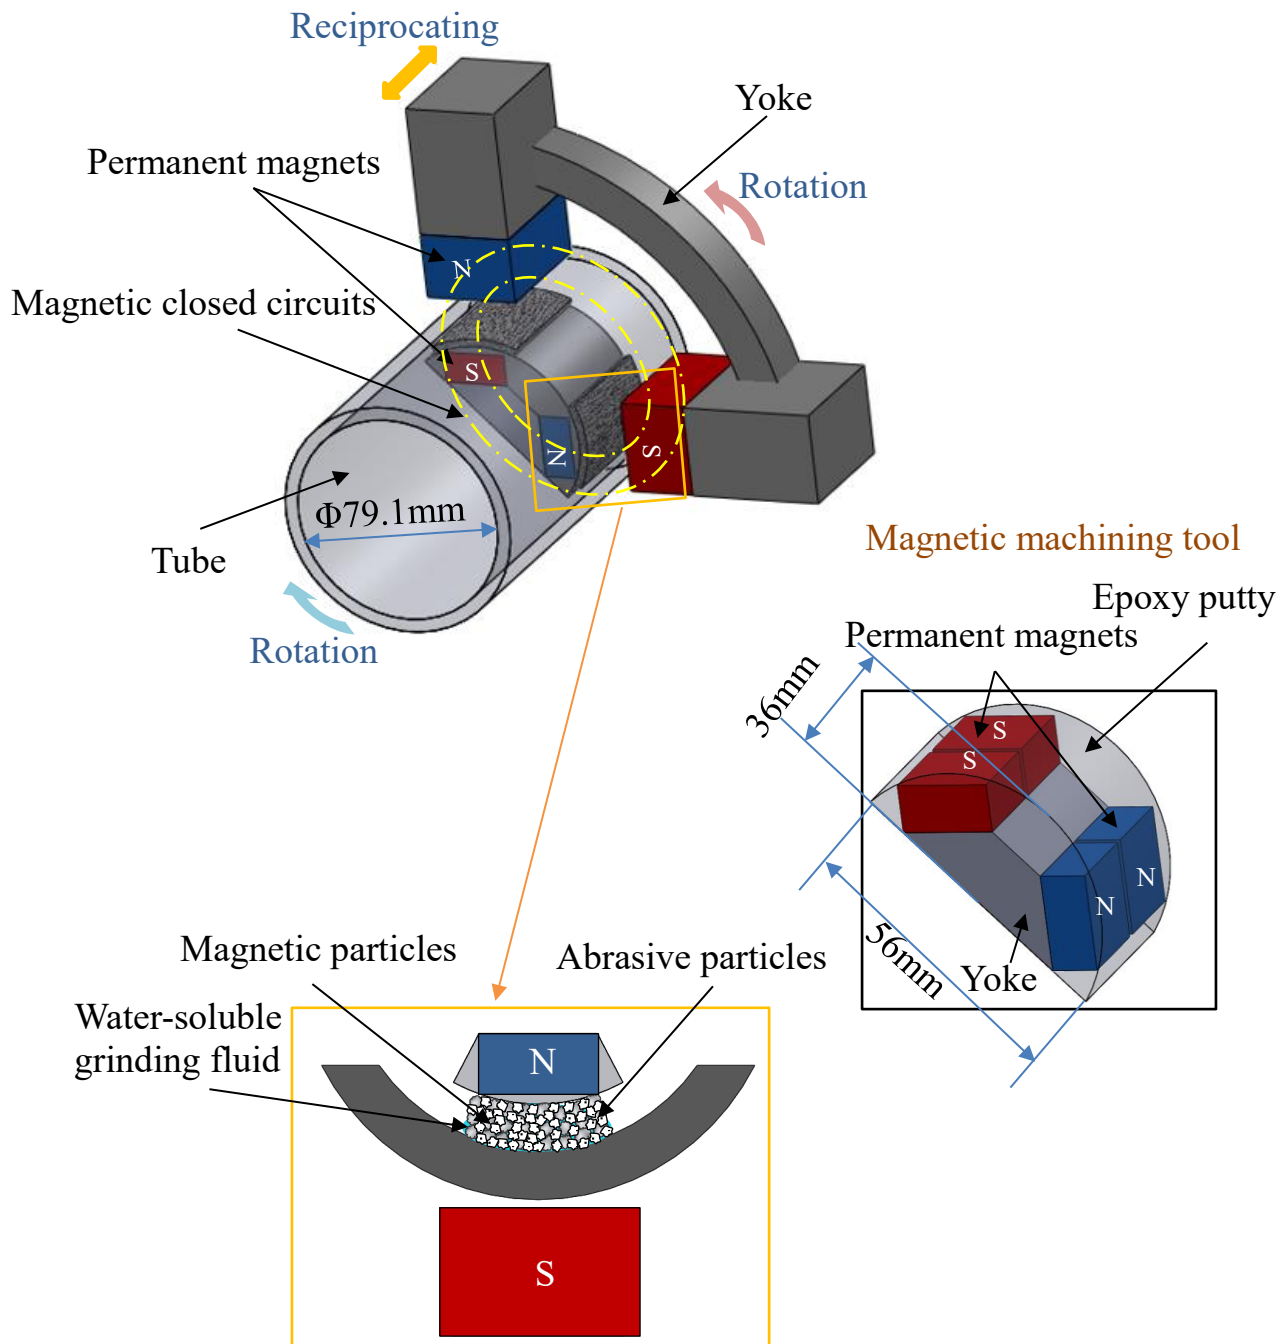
Schematic of the internal magnetic abrasive finishing process using magnetic machining tool
